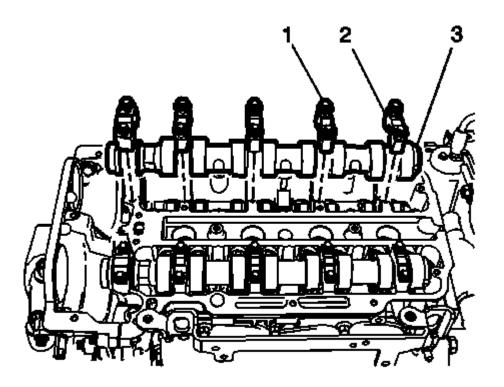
Camshaft Bearing Caps And Bolts Courtesy of GENERAL MOTORS COMPANY
